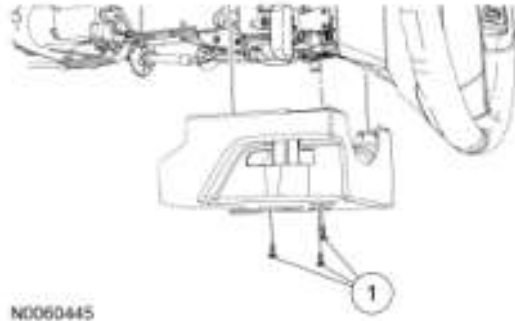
Locating Transmission Insulator And Retainer Bolts
